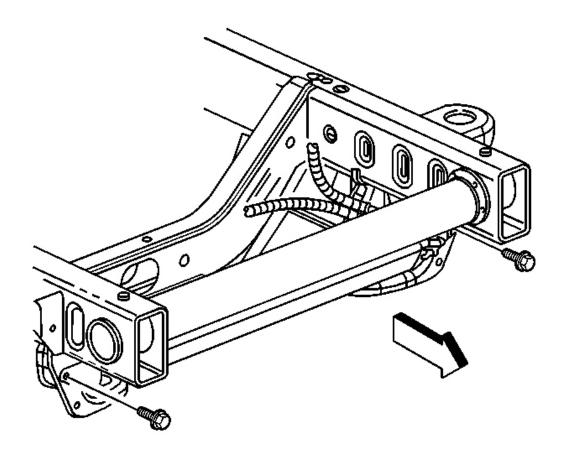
Removing/Installing Power Steering Cooler Mounting Bolts Courtesy of GENERAL MOTORS CORP.
